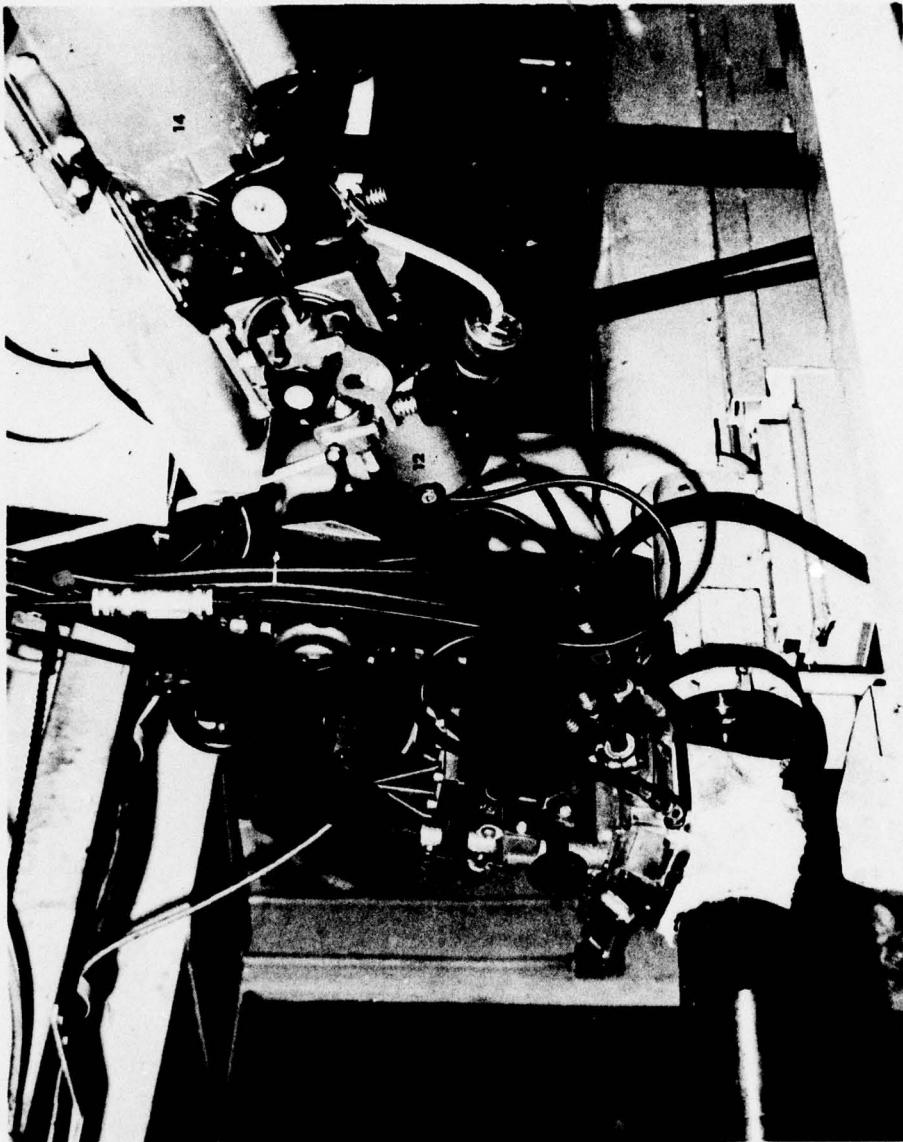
Rear View of PAHW Banding Machine Illustrating Hot Wire Conduit, Wire Drive, Wire Counters and Wire Straighteners.
